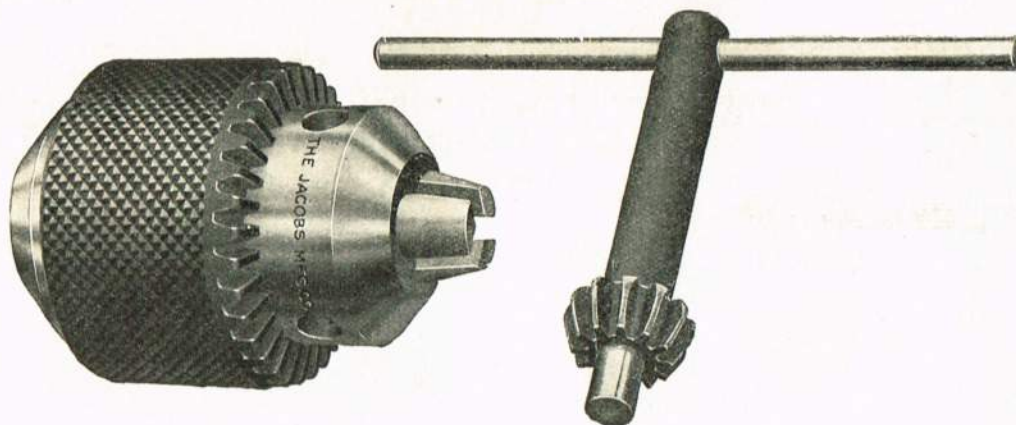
JACOBS' IMPROVED DRILL CHUCKS. With Chamfer at back.
